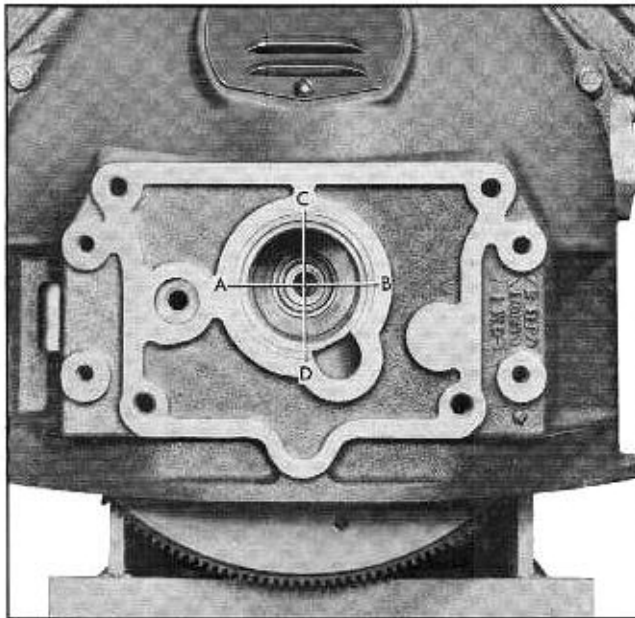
Dial Indicator in Place to Check Housing Hole
